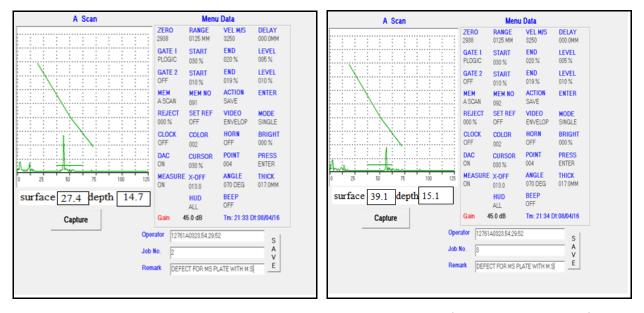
Mild steel plate clad with Mild steel electrode with surface and depths defects
